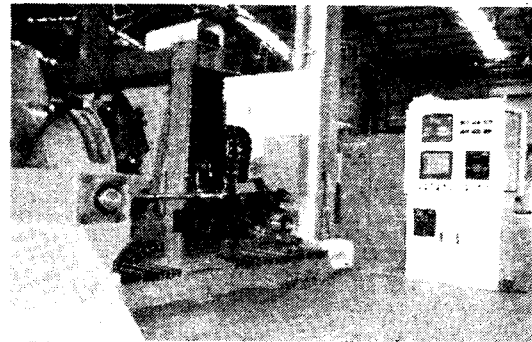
Hot-wire TIG System for nozzle overlay welding
